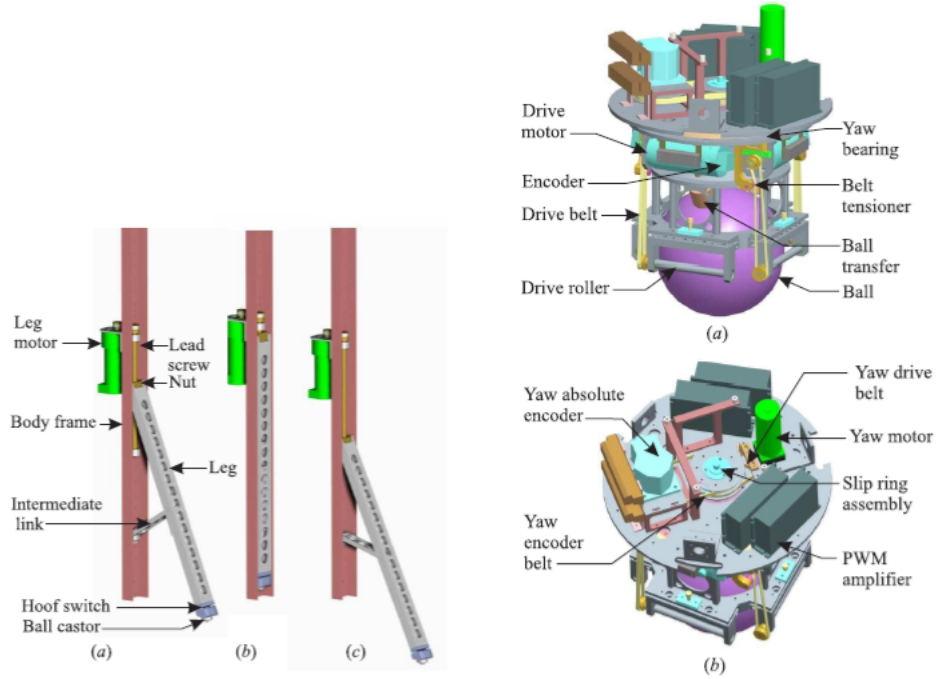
(a) View showing main drive arrangement, (b) View showing yaw drive mechanism
